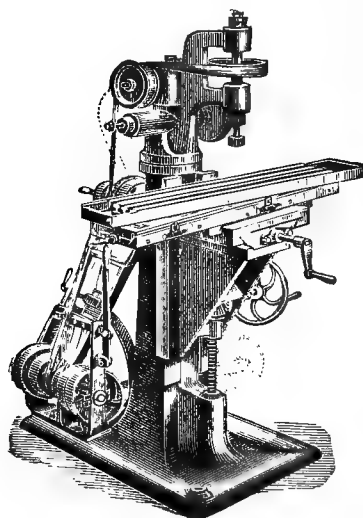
Milling machine with vertical and horizontal spindles; P. Huré, France.
